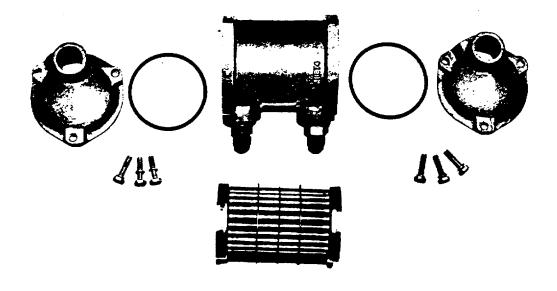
Exploded View of Gearbox Oil Cooler. (lowline engines)
